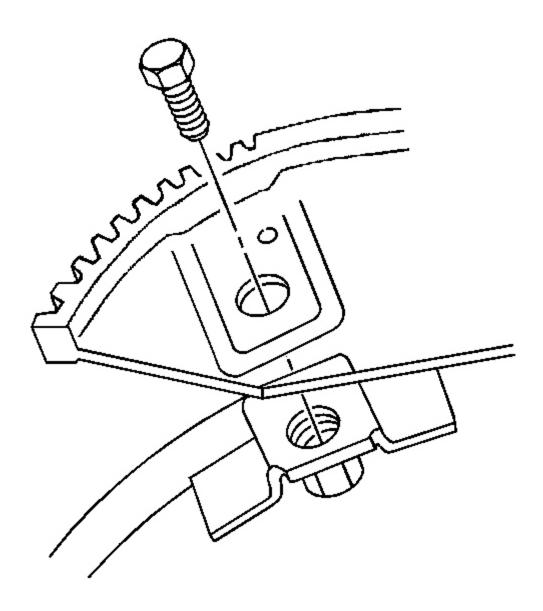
Flywheel-To-Torque Converter Bolts Courtesy of GENERAL MOTORS CORP.
